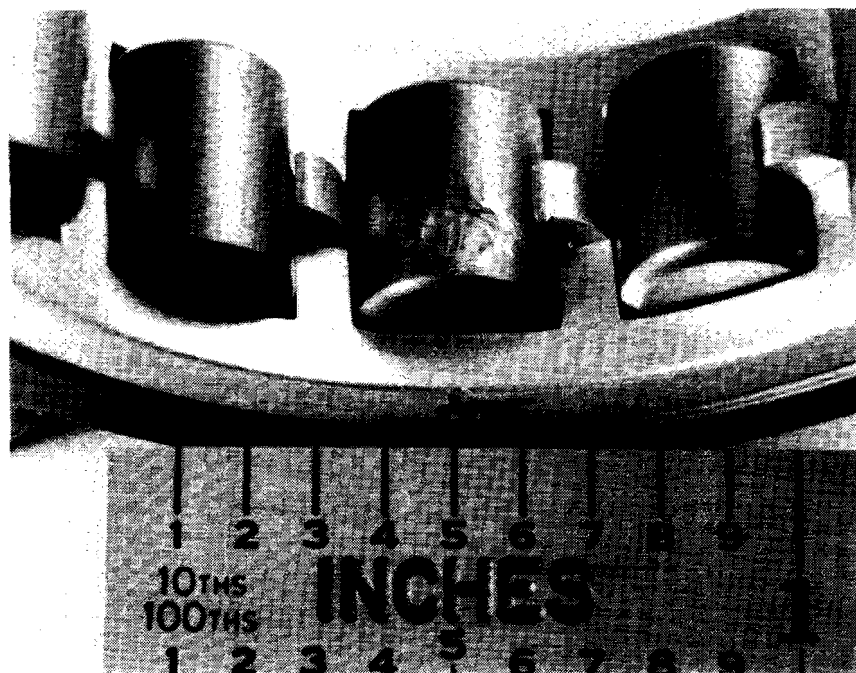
90-Degree Gearbox -455 Bearing Roller Defect C/D,
